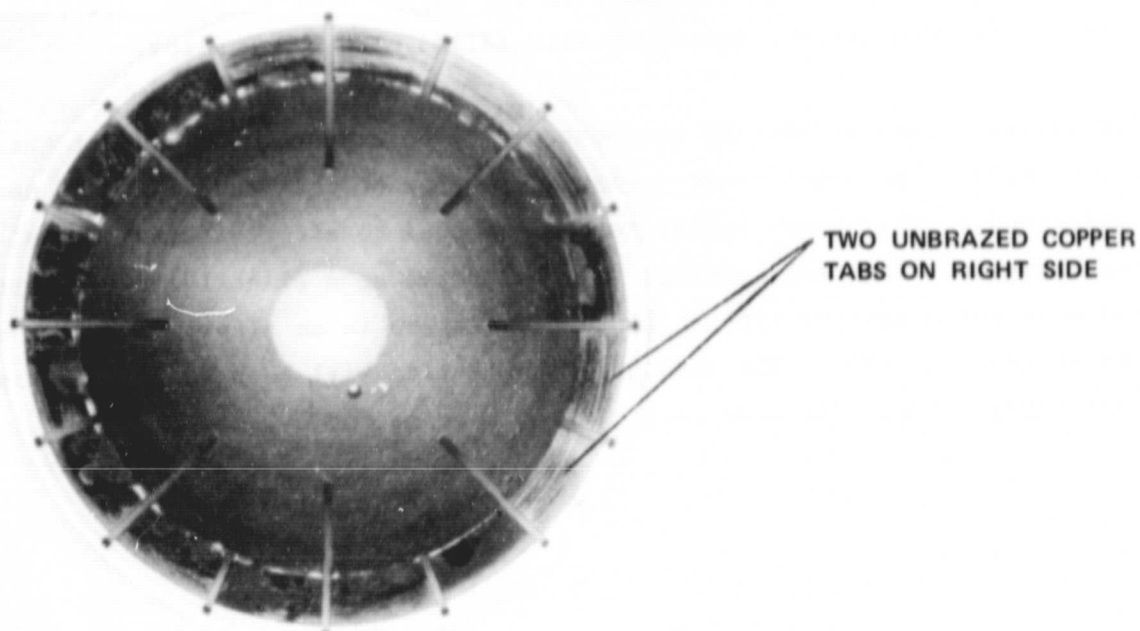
Top view of first brazed subassembly consisting of PG electrode (center) brazed to outer copper support ring with Ticusil braze alloy. Mag. 1.4X.
